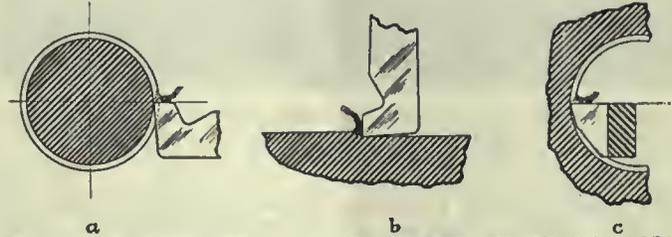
IMPROPER FORMS OF LATHE, PLANER AND BORING TOOLS.
